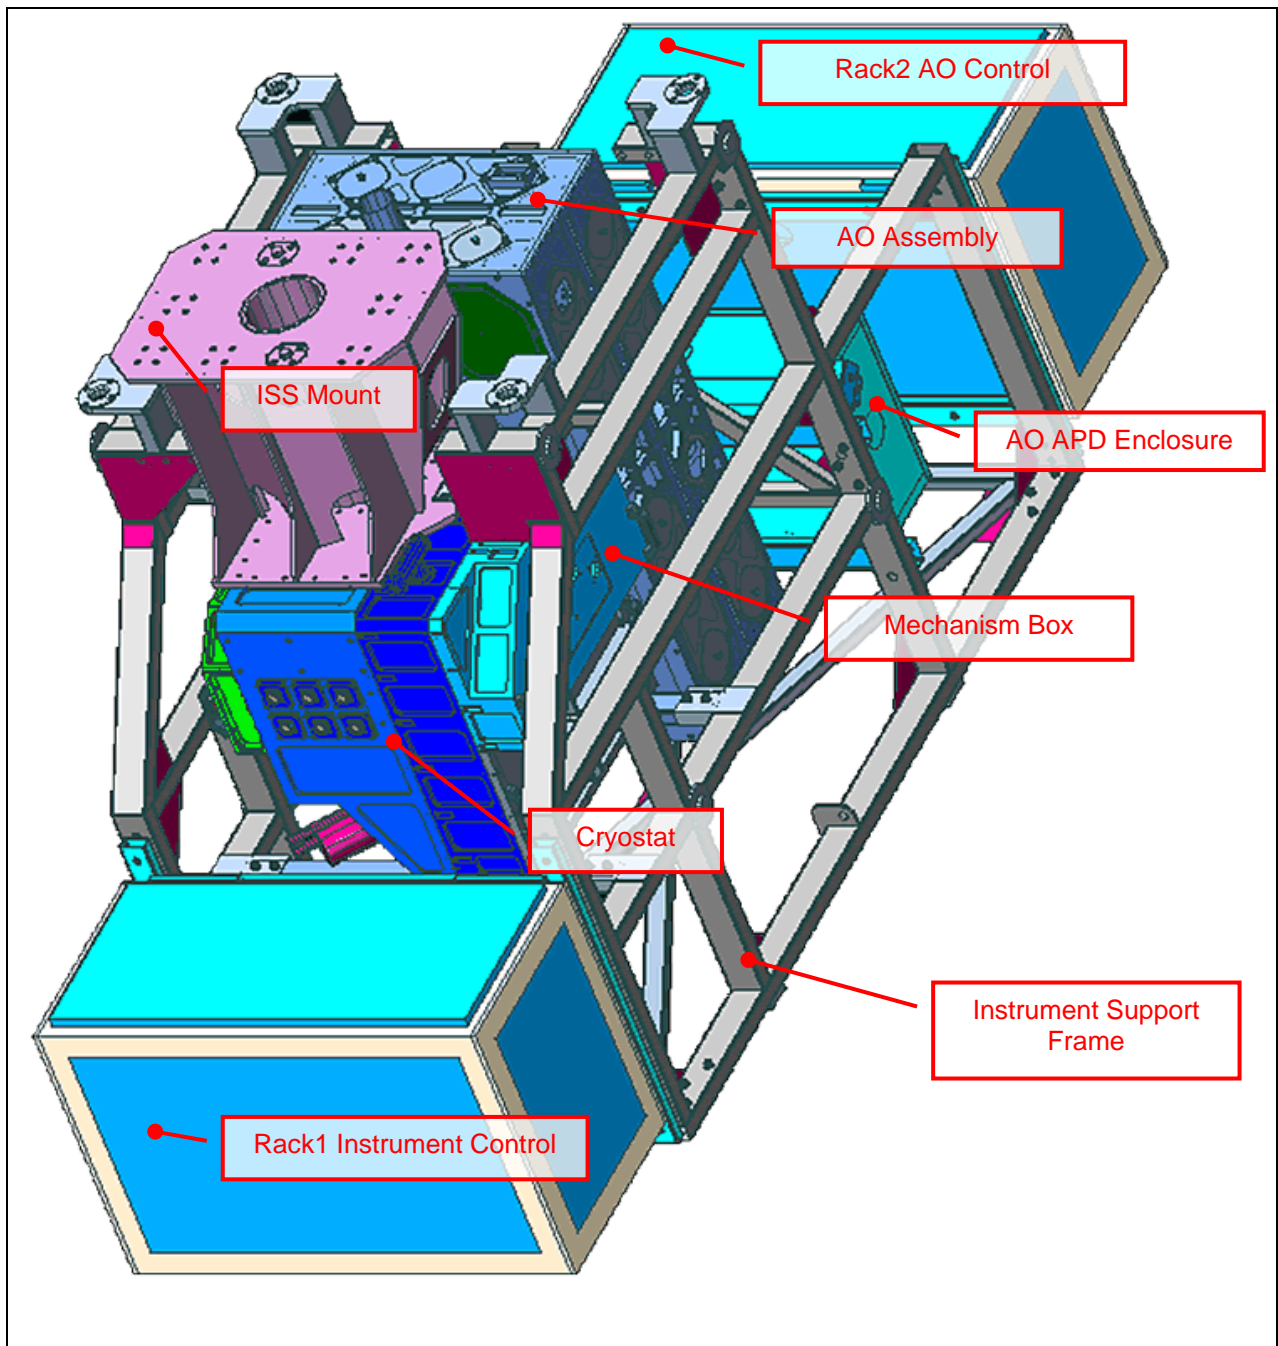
CAD Drawing of the NICI Instrument, Major Assemblies
